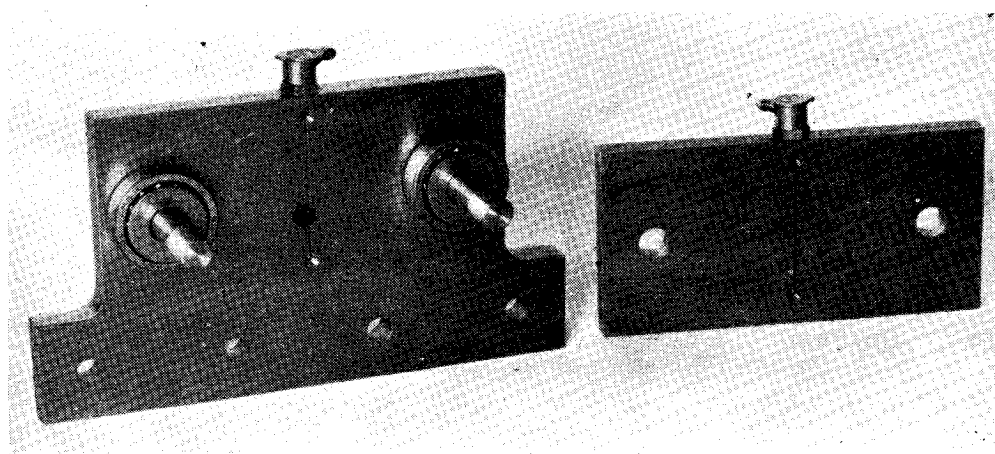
A. The parts of the carriage, showing the bearings in position and the lubrication system
